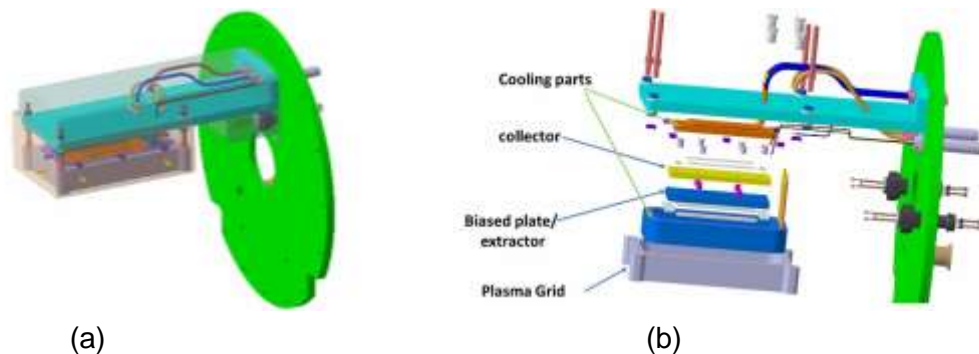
a) 3D view of the radial extraction configuration. b) Exploded view of the final configuration
